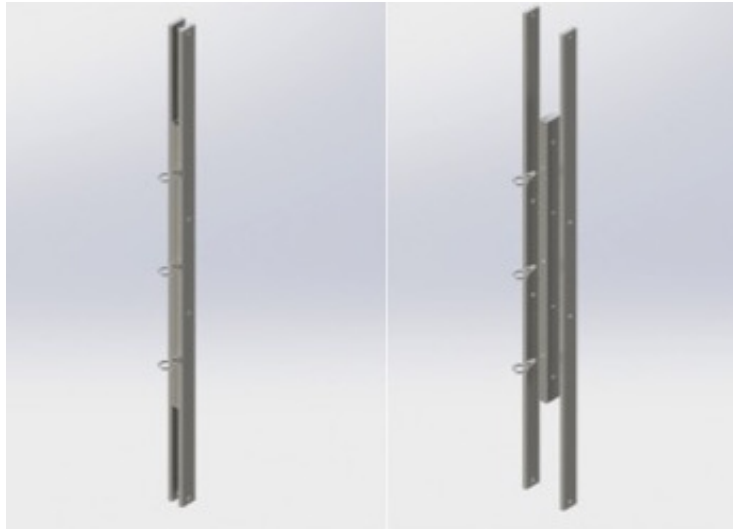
Assembled and Exploded Views of the 5-Foot Frame in SolidWorks
